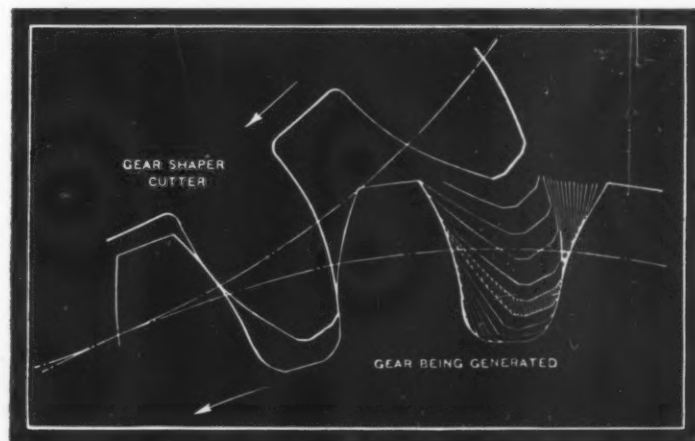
Reciprocating cutter has same shape as a pinion of the system to be cut. Blank and cutter rotate in opposite directions
